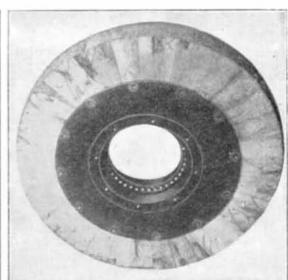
Wheel Formed of Wood Segments, Showing Ball Bearing in Hub.
